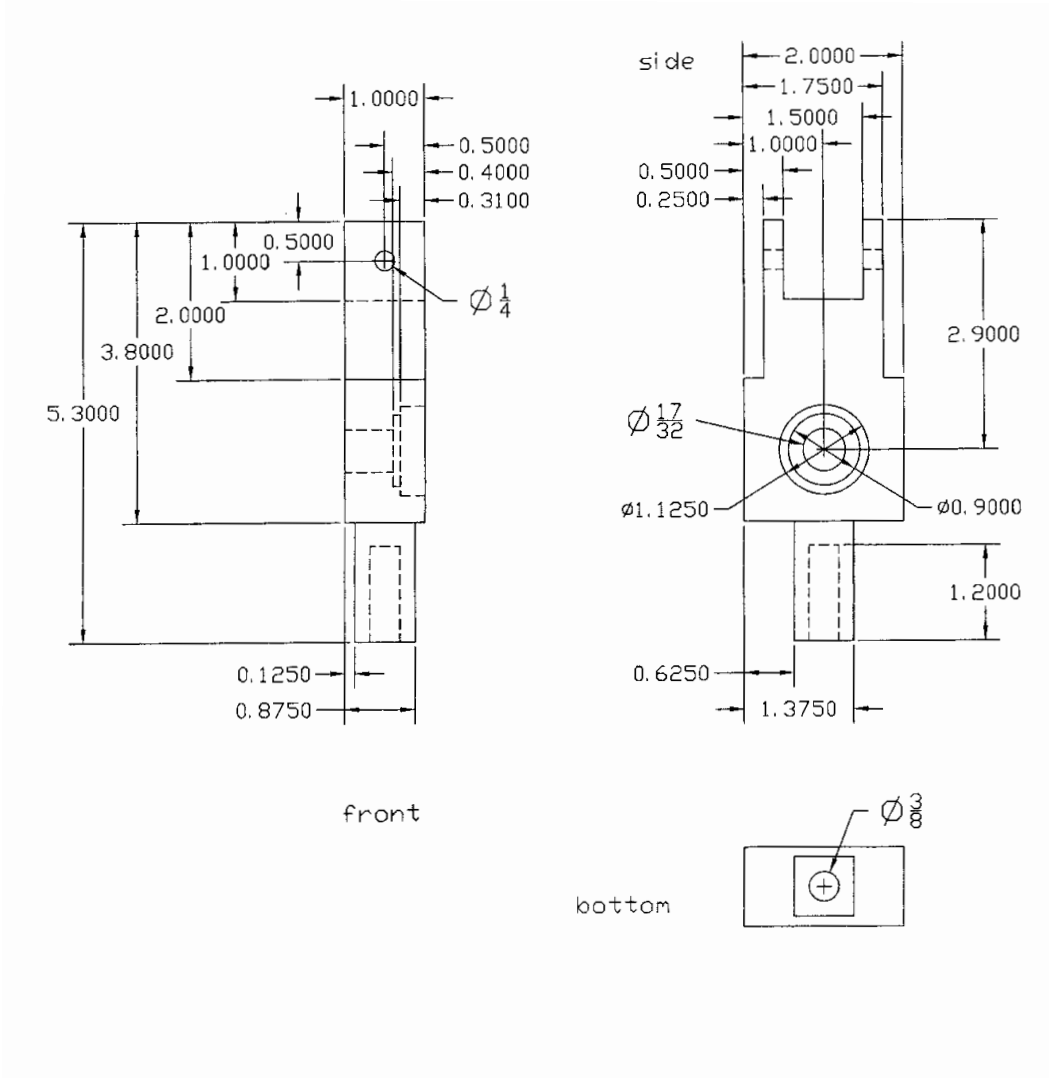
CAD details of the outer hips (plugs). These pieces are machined from aluminum block.
